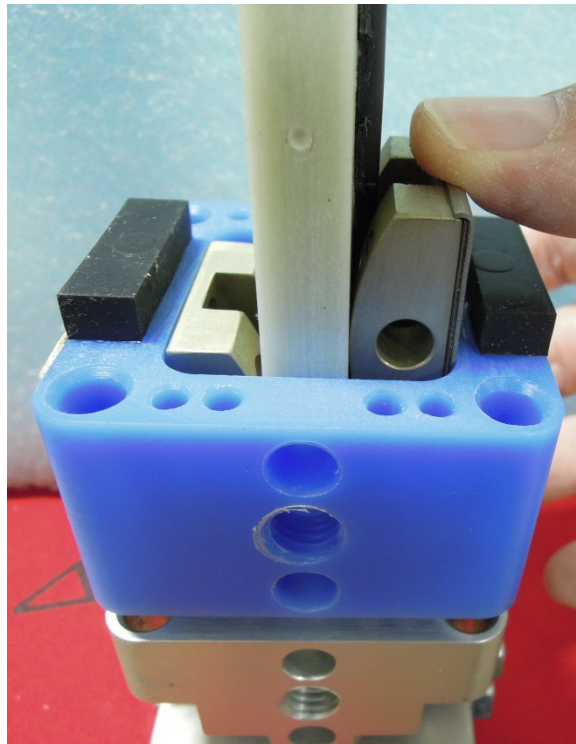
Fitting the spacer-shim assembly to the non-impact side
